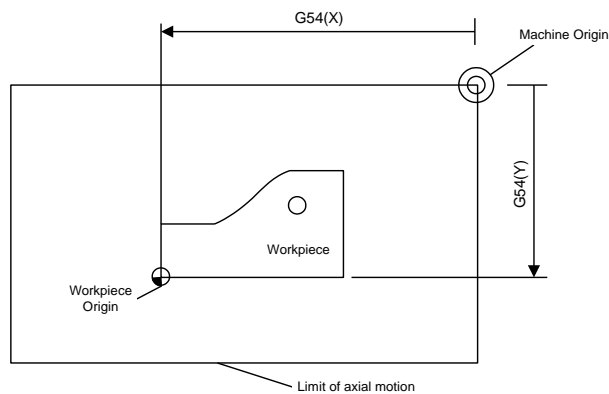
The relationship of workpiece offset and machine coordinate system
